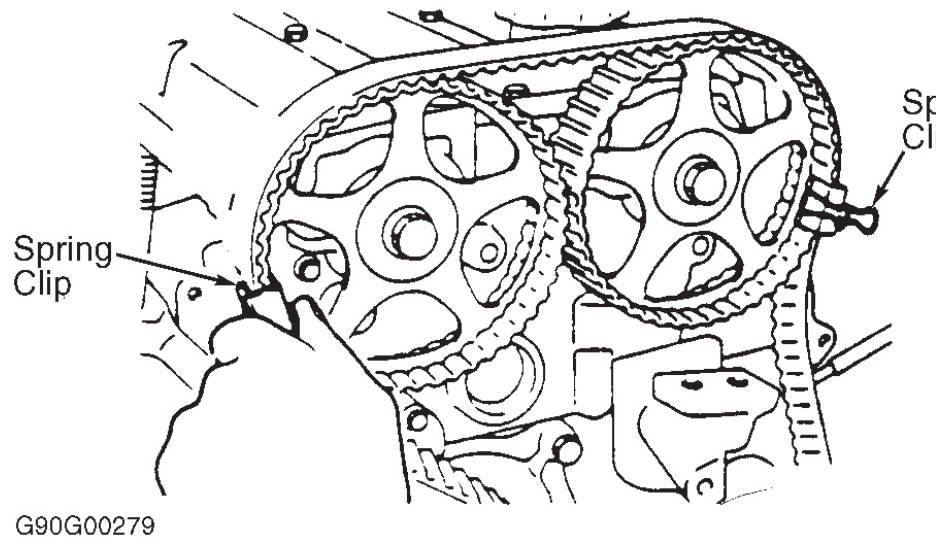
Installing Timing Belt On Camshaft Sprockets
